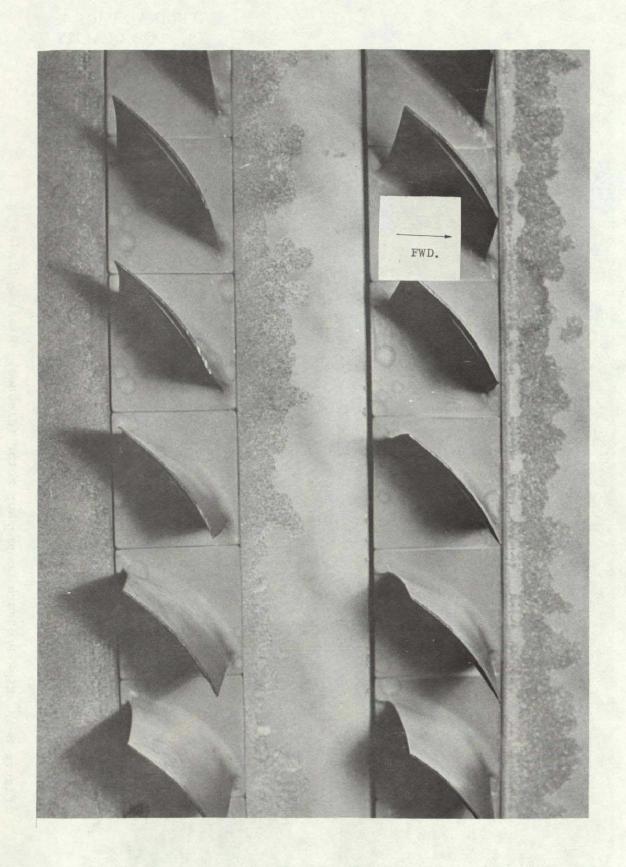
HP Compressor Rotor Stages 13 to 15 Land Coating.
